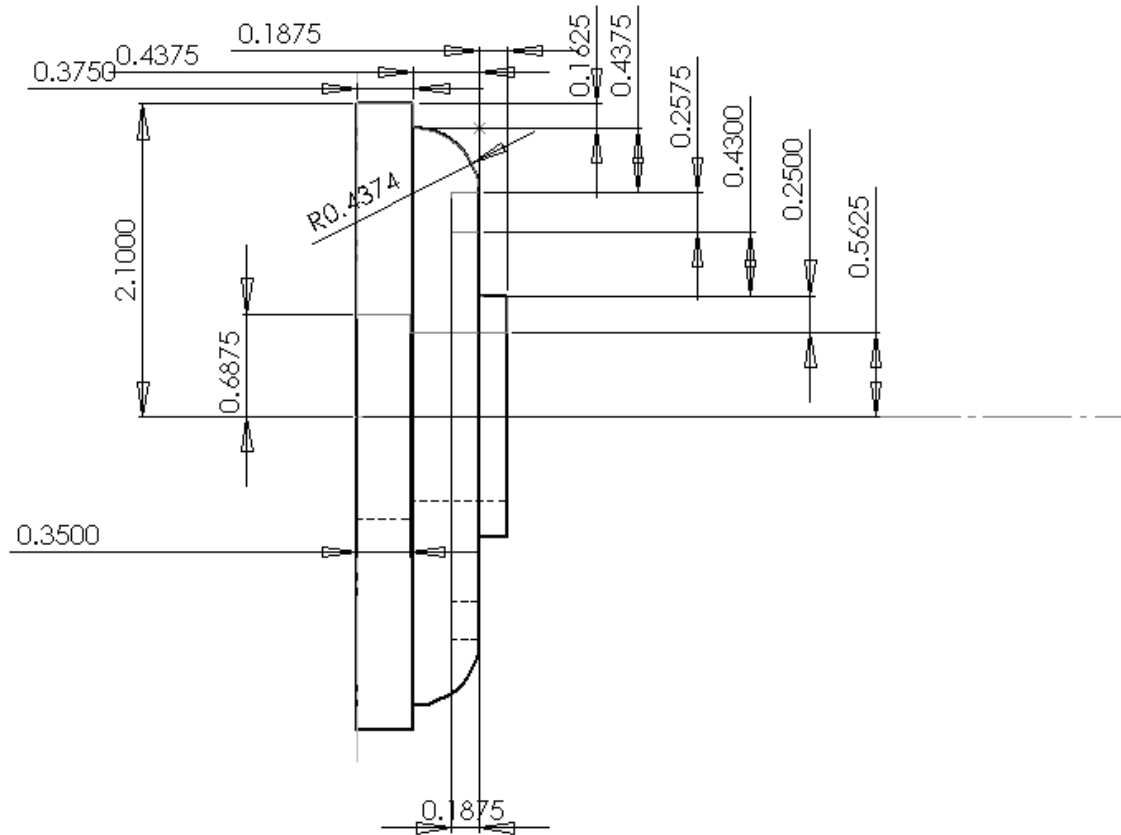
Mechanical drawing of the side view of the part *left dummy hub.sld
